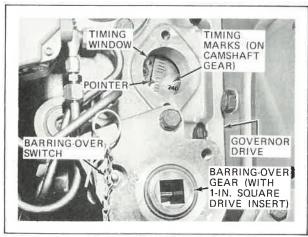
GOVERNOR DRIVE WITH COVERS REMOVED.
